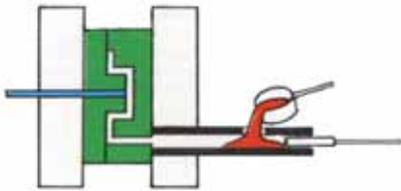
Starting point of the cold chamber die-casting machine cycle. Molten metal is being poured into the cold chamber.
